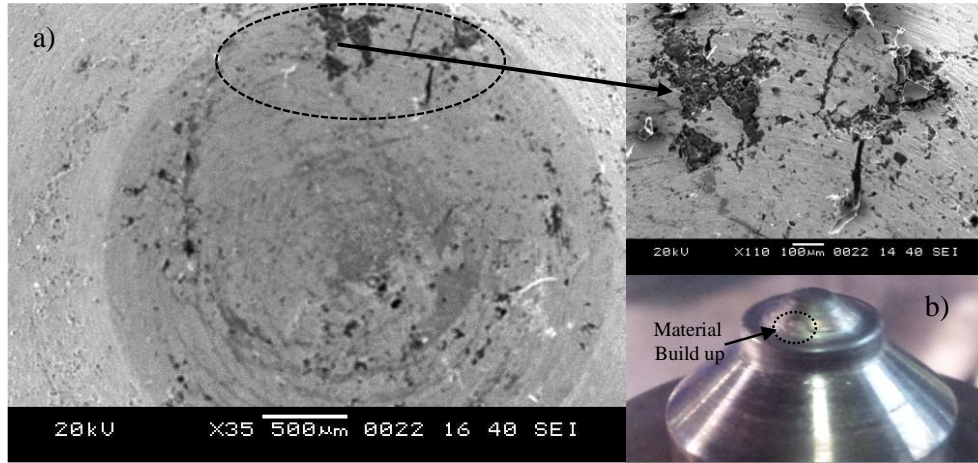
a) FESEM of tool b) buildup of base metal on tool
